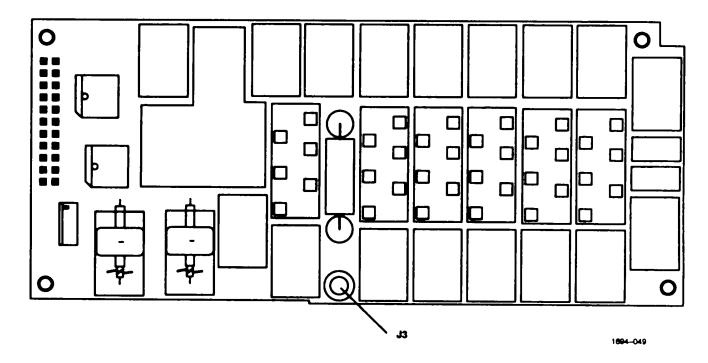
A8A2 Harmonic Filter PWB Assembly Components Location Diagram (10303-2140 Rev. C)
